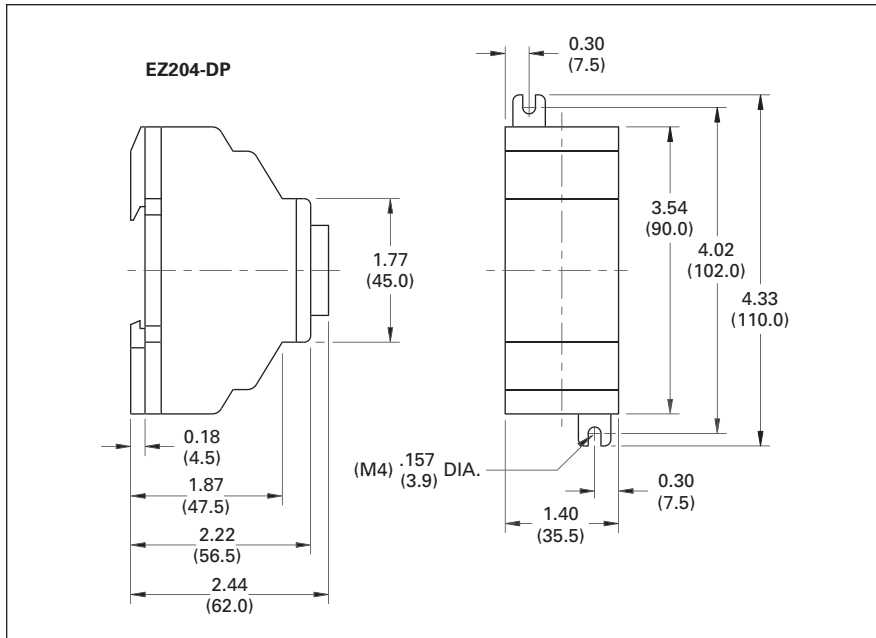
EZ204-DP Series Dimensions in Inches (mm), Drawing Number MD05013011E
